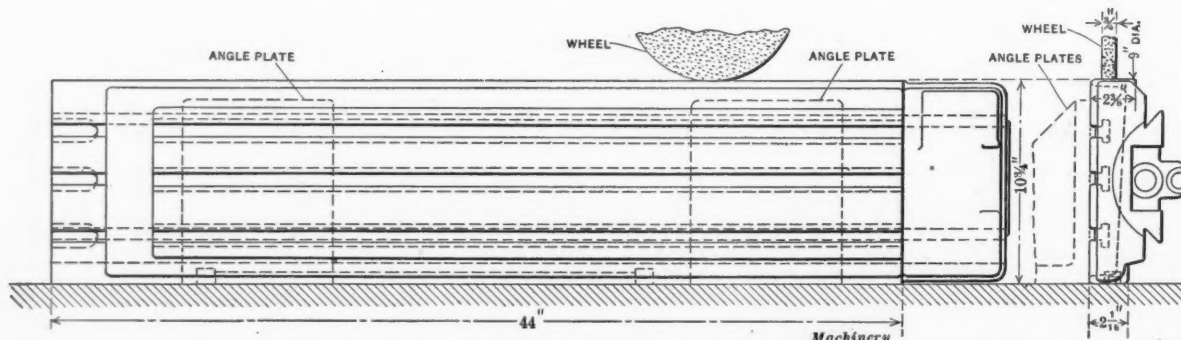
Method of grinding Both Edges of a Milling Machine Table
